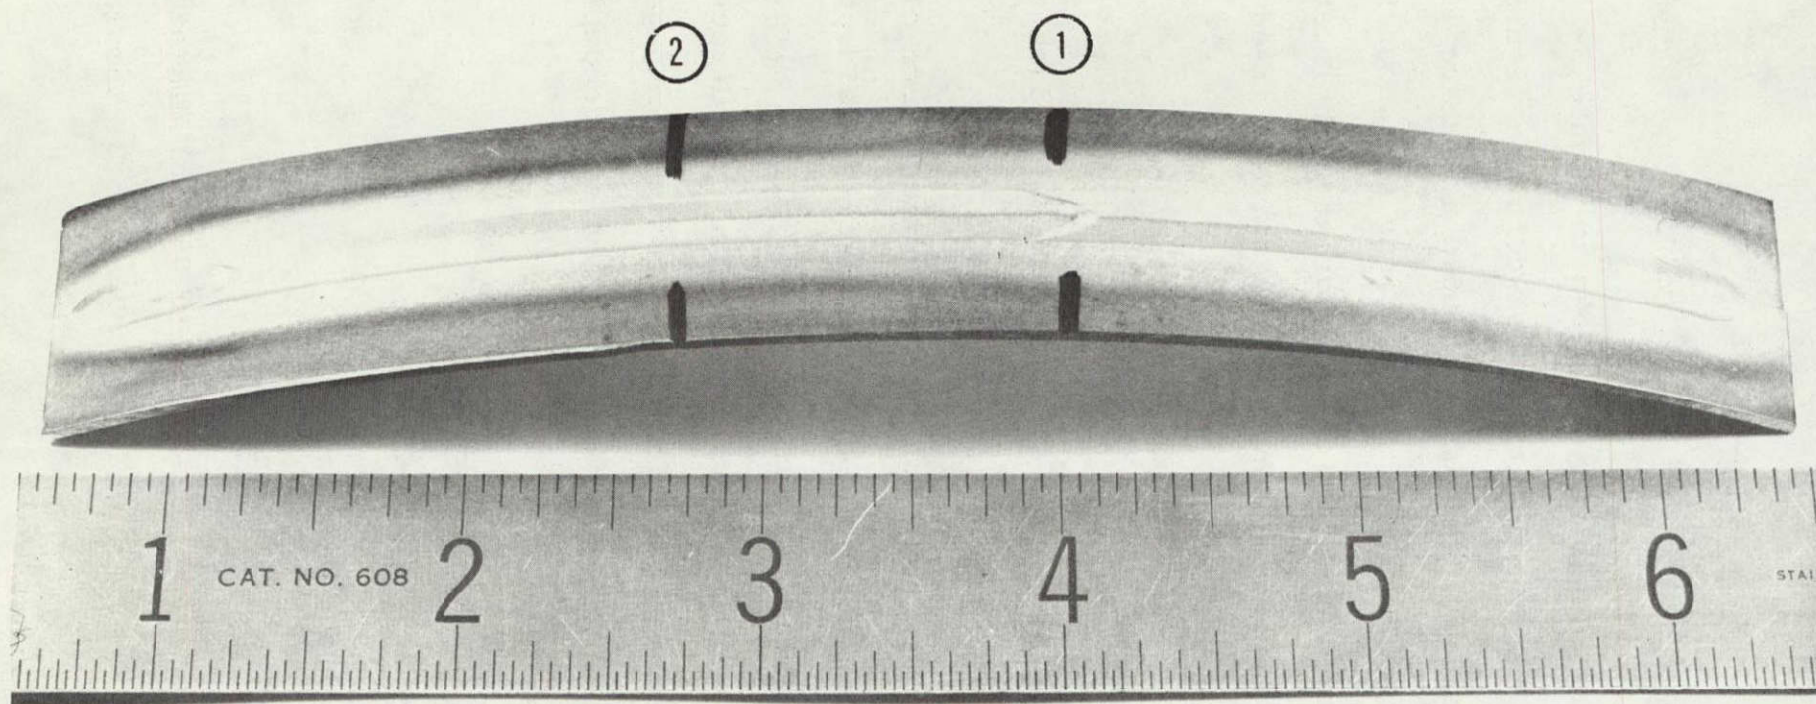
Automatic GTA Welded Curved 0.13 cm (0.050 Inch) Thick C-103 Sheets with Rabbetted Edges for Self Fixturing. Cuts were made at the Indicated Positions for Metallographic Examination.
